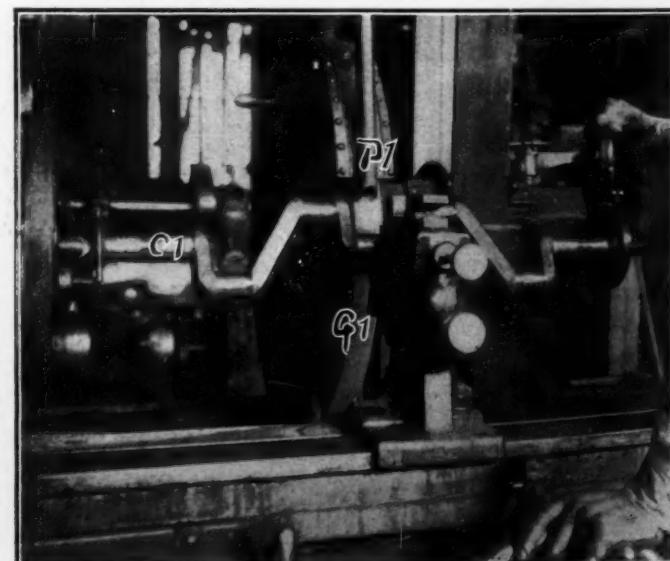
Landis Grinder in the Regal plant finishing crankshaft bearings to make them round and true
